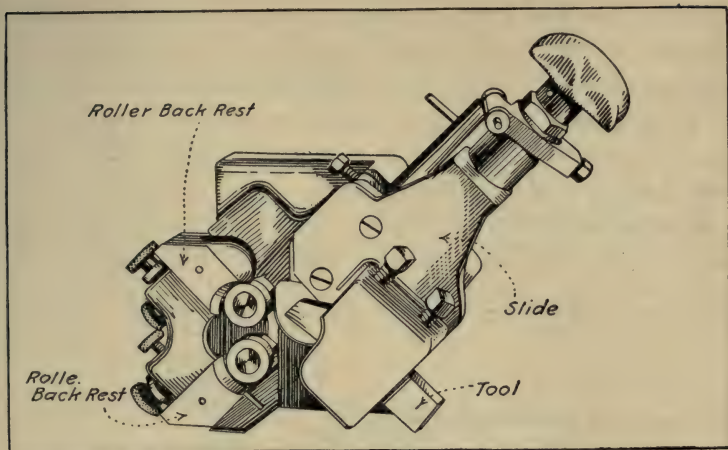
ADJUSTABLE TURNING TOOL WITH ROLLER BACK RESTS
